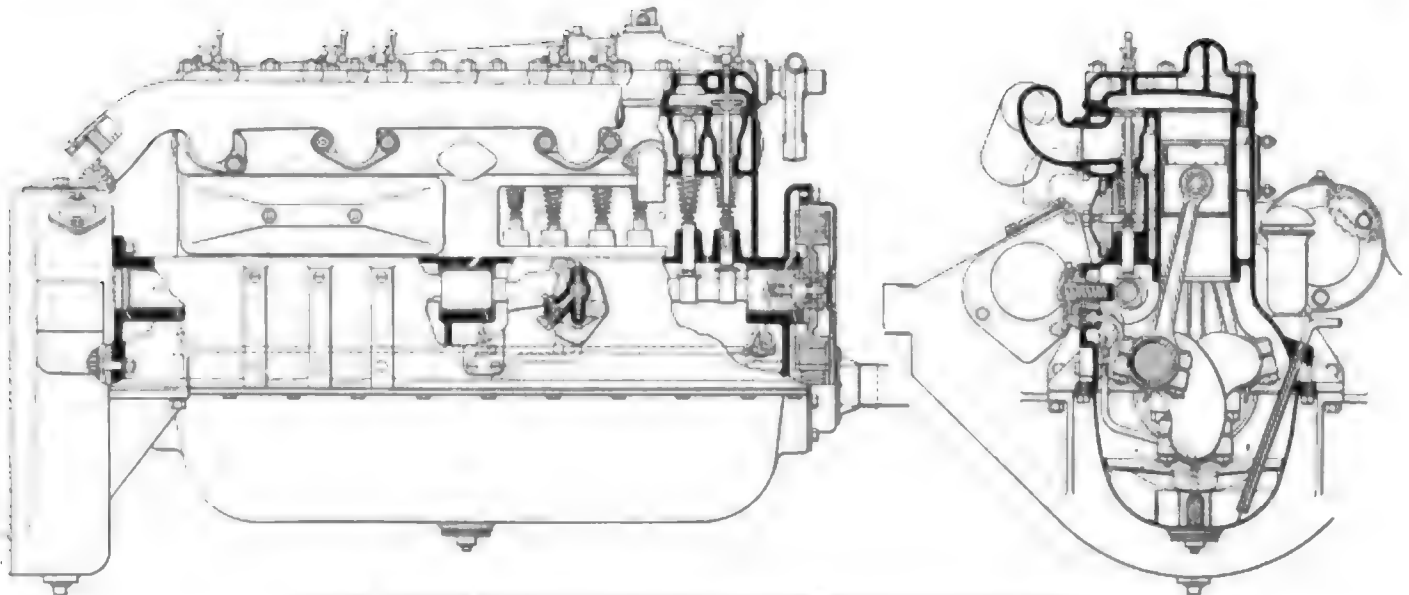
Sectional drawings of Continental engine published upon request of reader
